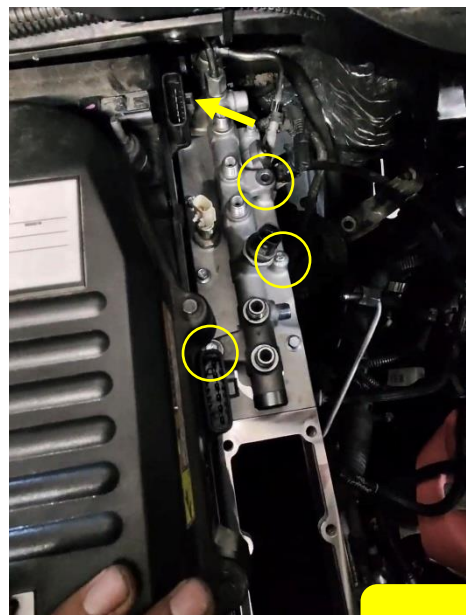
Fuel rail installed, M8 1.25x50 bolts circled.
